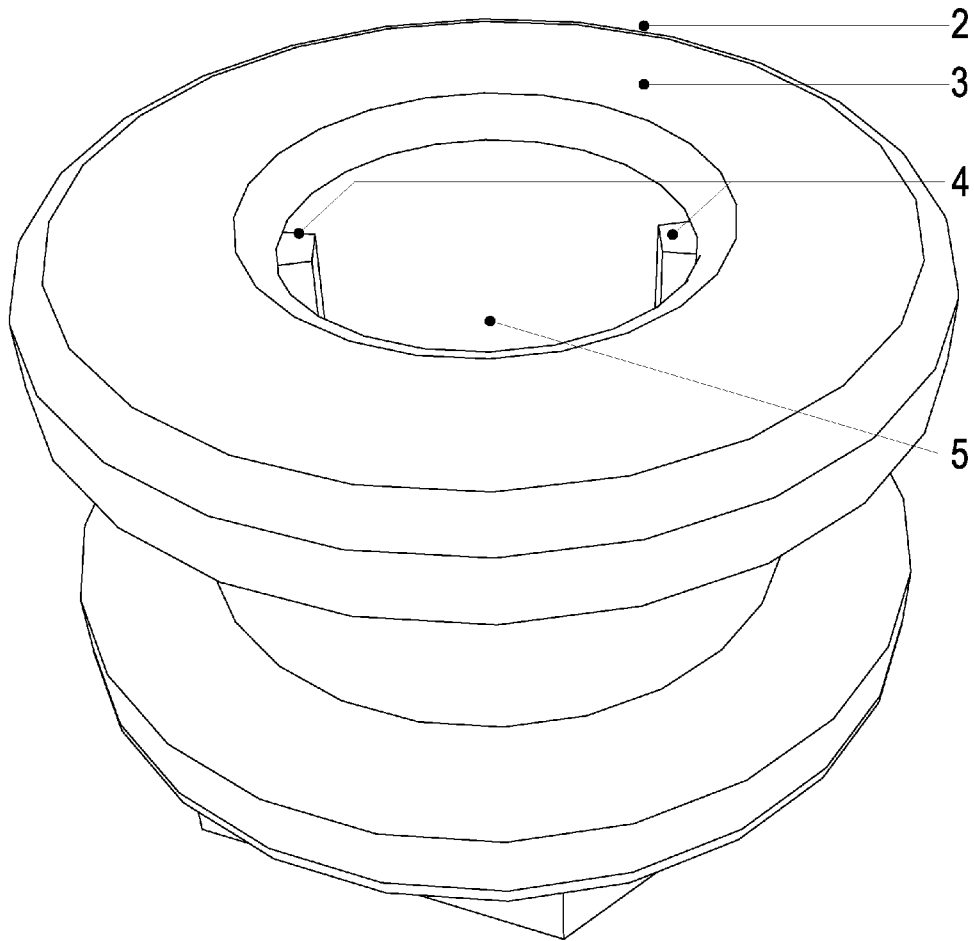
PERSPECTIVE SEACOCK PLUG UNASSEMBLED
